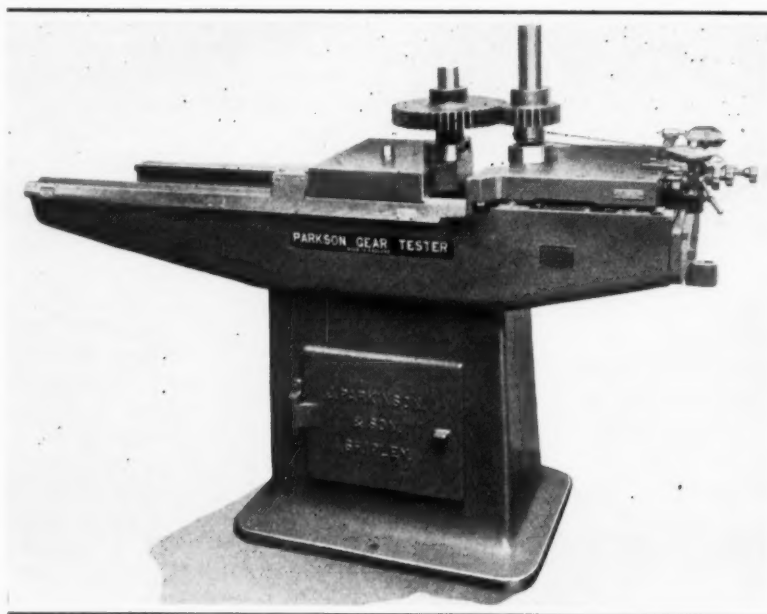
Parkson Improved Gear Tester Equipped for Testing Spur Gears
